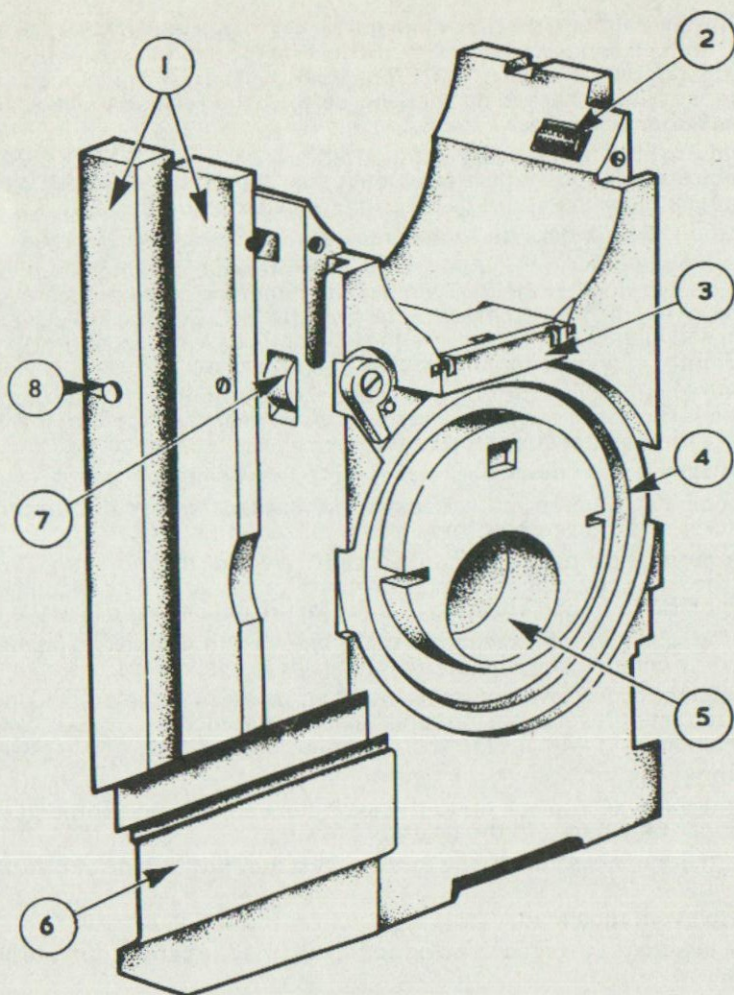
120mm Breech ring with obturator tool assembly fitted
